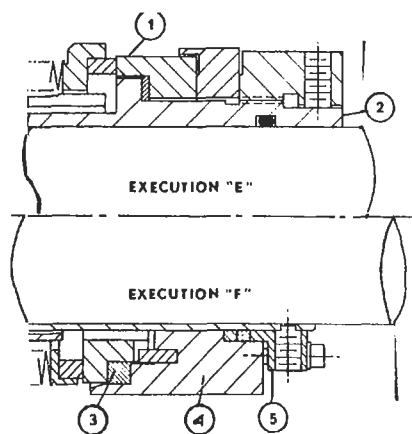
Two different mounting methods for rotating hard faces in mechanical seals.
